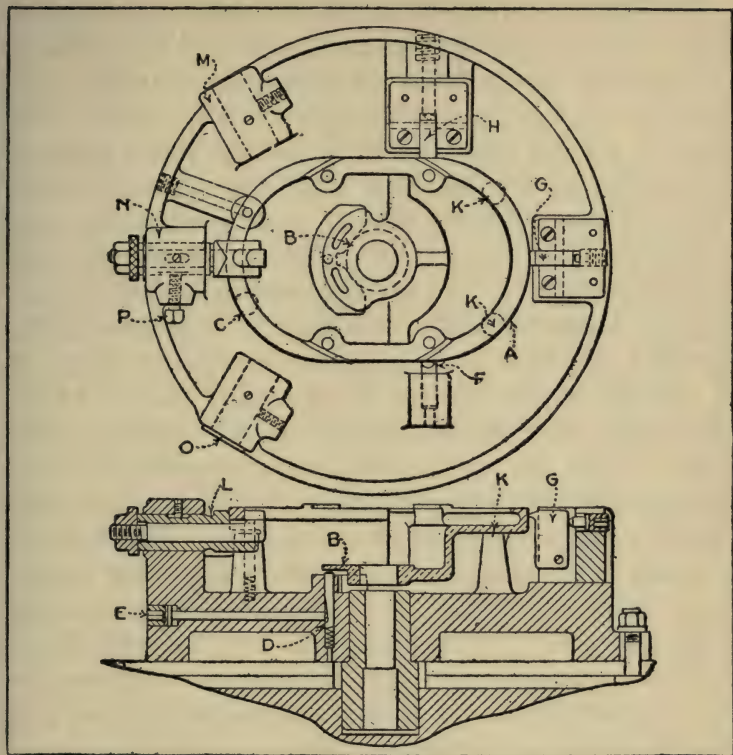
PLAN AND SECTION OF A VERTICAL BORING MILL FIXTURE FOR A FRAGILE ALUMINUM CASTING
